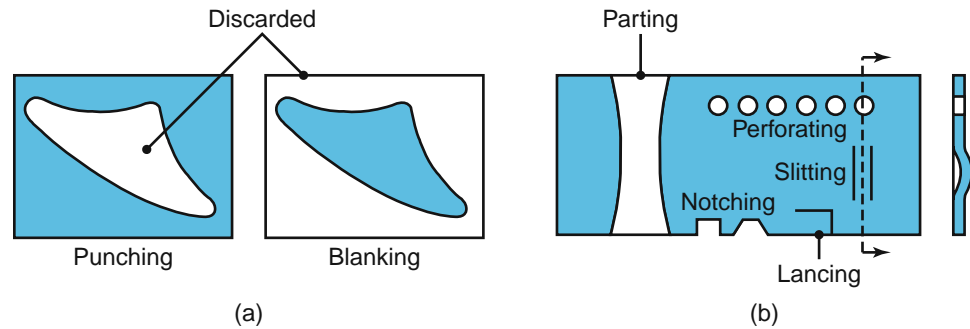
(a) Punching (piercing) and blanking. (b) Examples of various die-cutting operations on sheet metal. Lancing involves slitting the sheet to form a tab.
